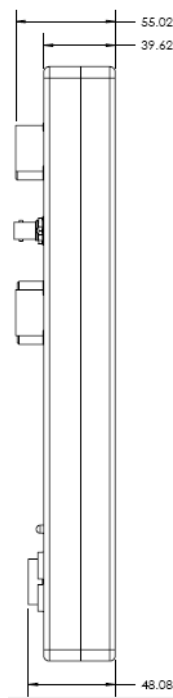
Hub Sync Unit (HSU) mounting dimensions, side (in mm)
